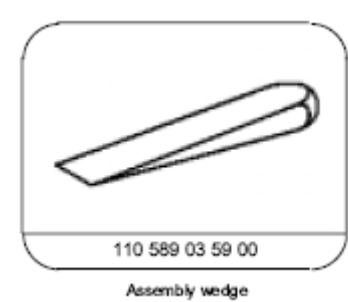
Identifying Assembly Wedge (110 589 03 59 00)
